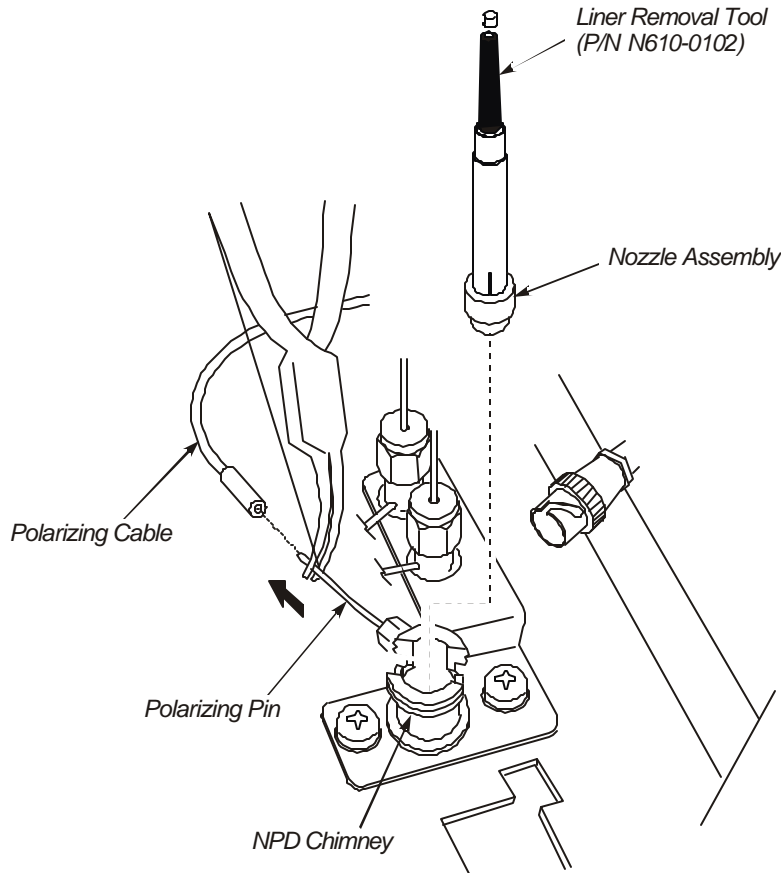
39 Removing the NPD nozzle assembly and polarizing wire
